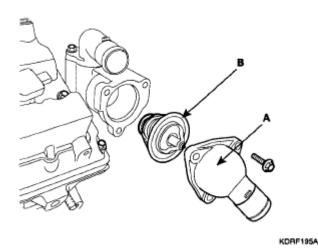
Identifying Thermostat With Jiggle Valve Courtesy of HYUNDAI MOTOR CO.
